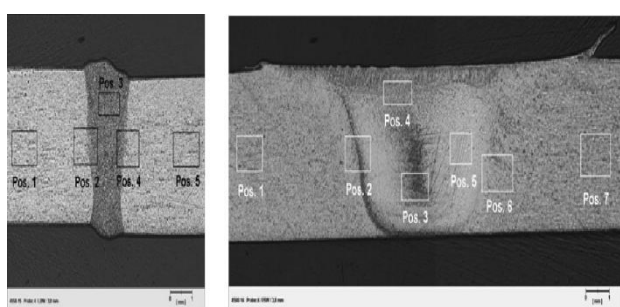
Welded AZ31B joints a) laser beam welded, b) friction stir welded
